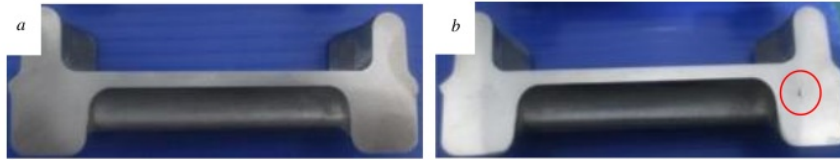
Visual inspection of the block compressor: (a) No defect. (b) Defect is Present.
